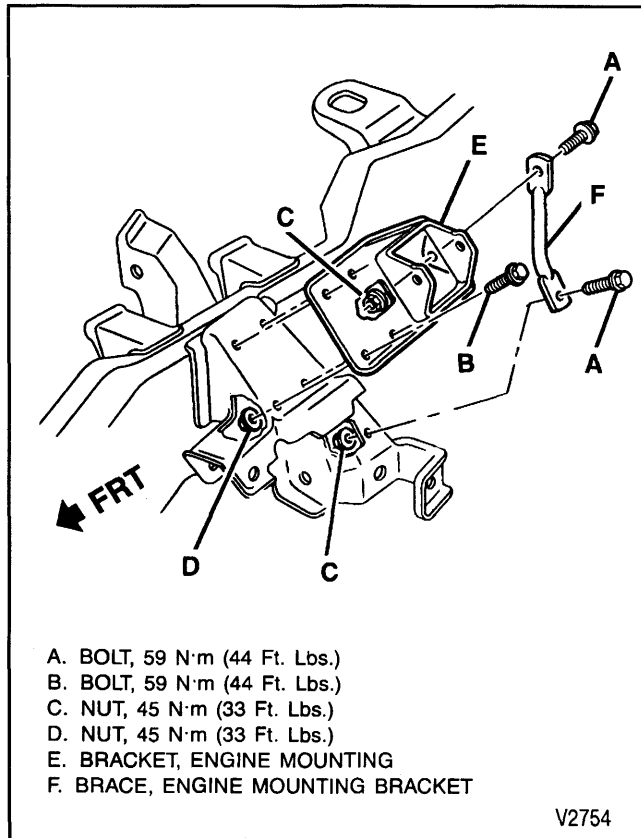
Front Engine Mounting Brackets to Frame (K1 and 2)
